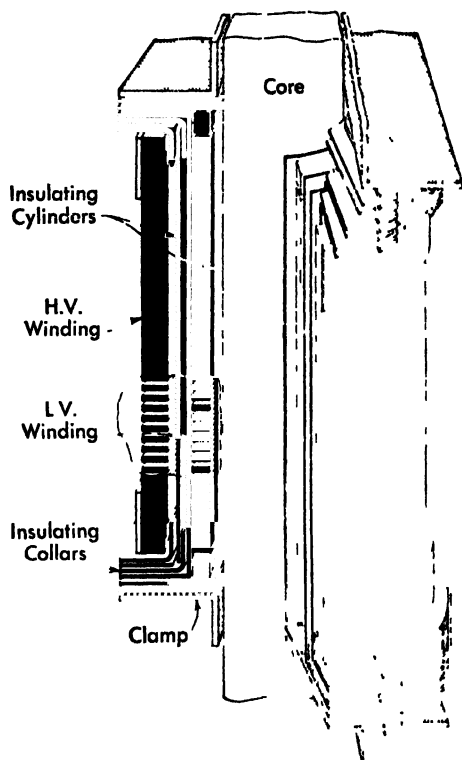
Cutaway view of concentric coils showing insulating cylinders and flanged collar.
